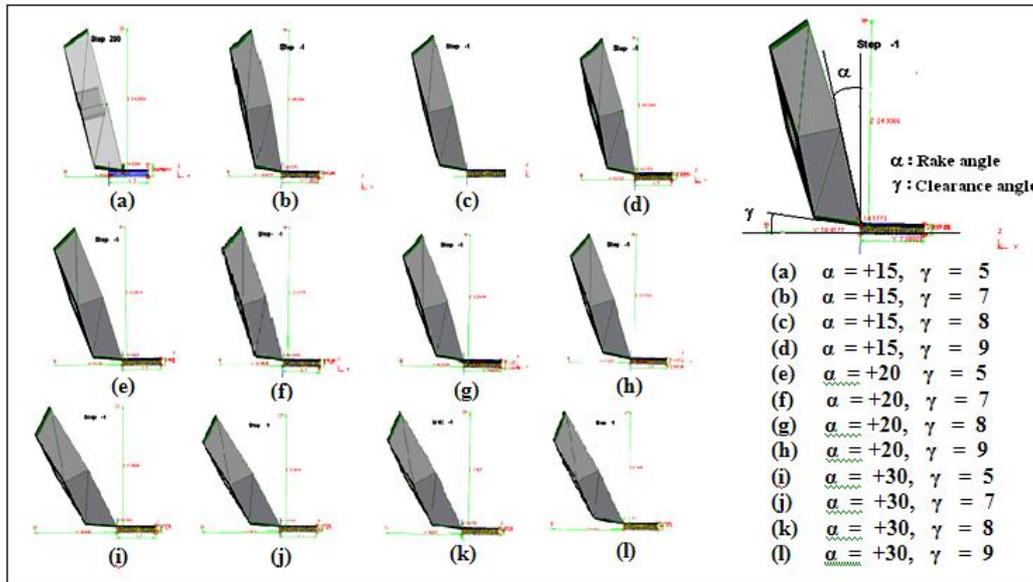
Modeling for 12 combinations of geometry designs of rake and Clearance angle for DNMA carbide tool cutting
